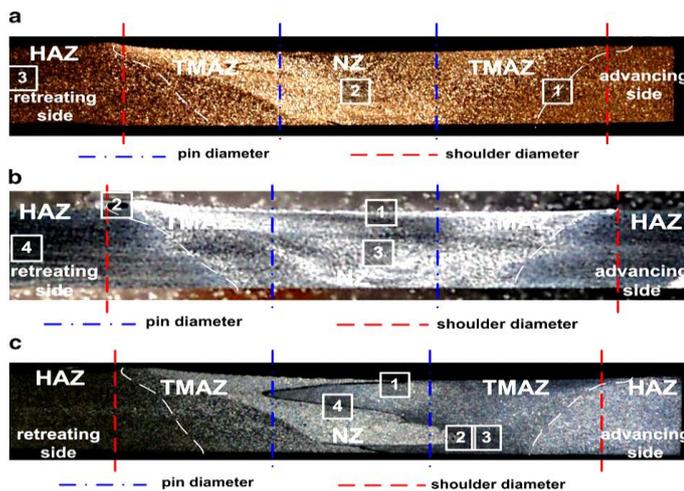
Macrostructure of the dissimilar weld and each base material: (a) macrostructure of the FS AA6082-T6 weld; (b) macrostructure of the FS AA6061-T6 weld; (c) macrostructure of the dissimilar weld.
